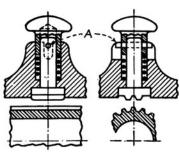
In this design, the pin A engaging in the slot prevents the plunger from turning. This detent is used as a temporary gear lock which is engaged for loosening a drawback rod through the gear.
